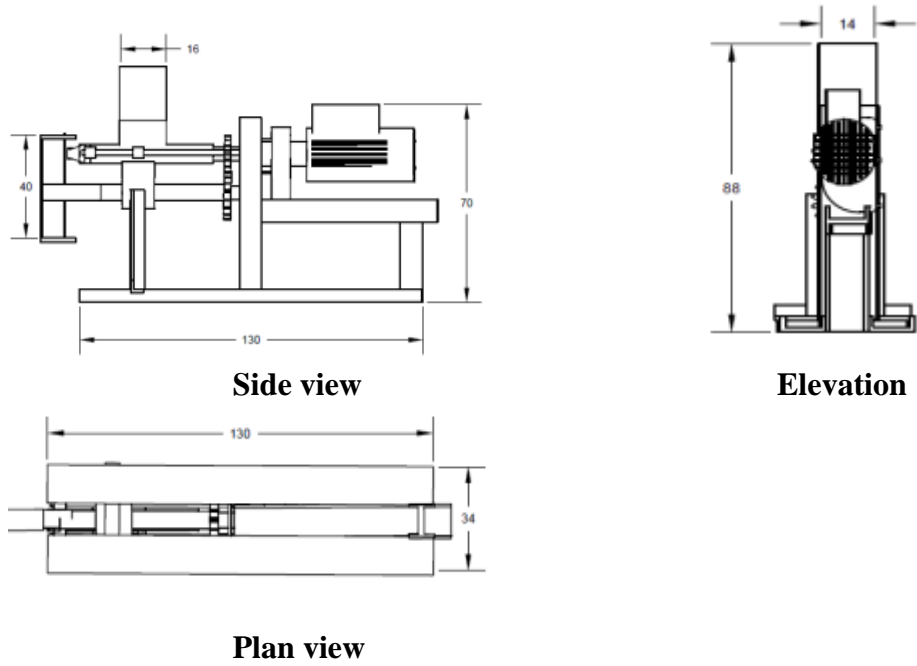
Orthographic Views of the Groundnut Cake Moulding Machine.
